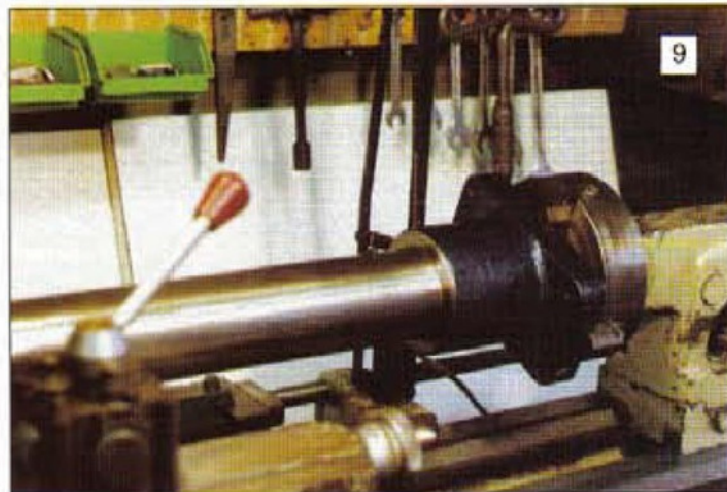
The use of 1/4in. square packing pieces interposed between jaws and workpiece to prevent the chuck from "taking charge".
